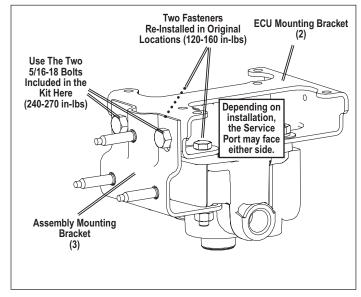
VIEW SHOWING CONTROLLER BRACKET AND ASSEMBLY MOUNTING BRACKET INSTALLED
